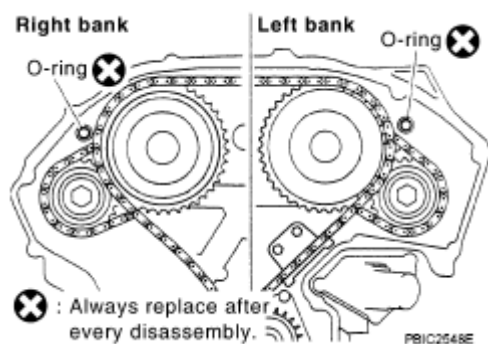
Identifying O-Rings In Rear Timing Chain Case
